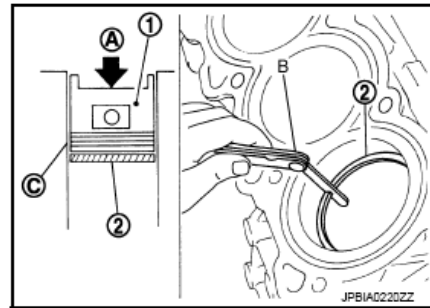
Measuring Piston Ring End Gap Using Feeler Gauge
